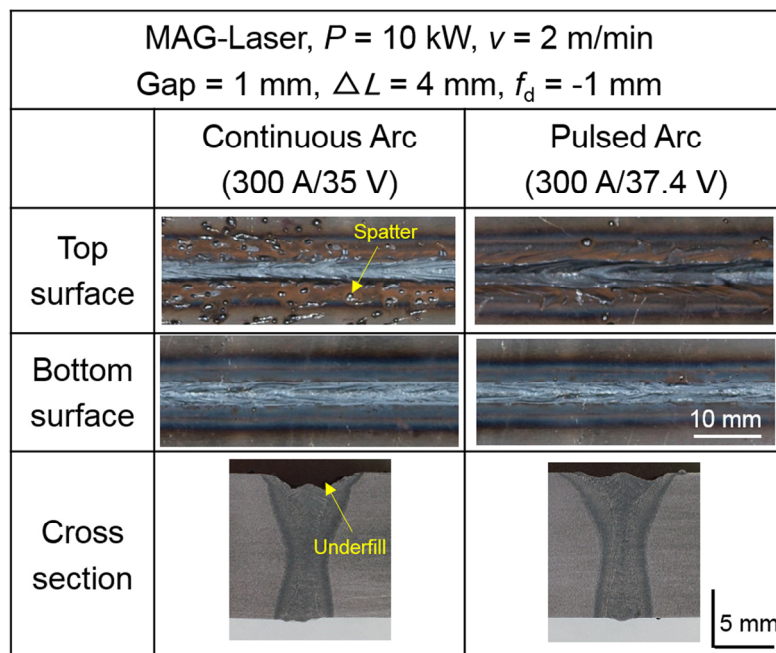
Surface appearances and cross sections of weld beads produced by hybrid welding with continuous arc and pulsed arc.
